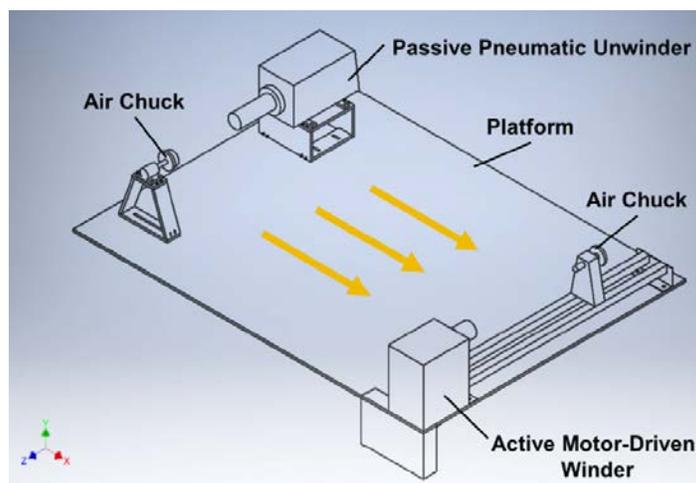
Schematic of spiral-wound membrane element rolling machine with tension control.
